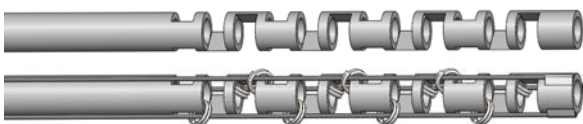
Tube cut pattern shown alongside full three cable assembly with cable-guide rings.
